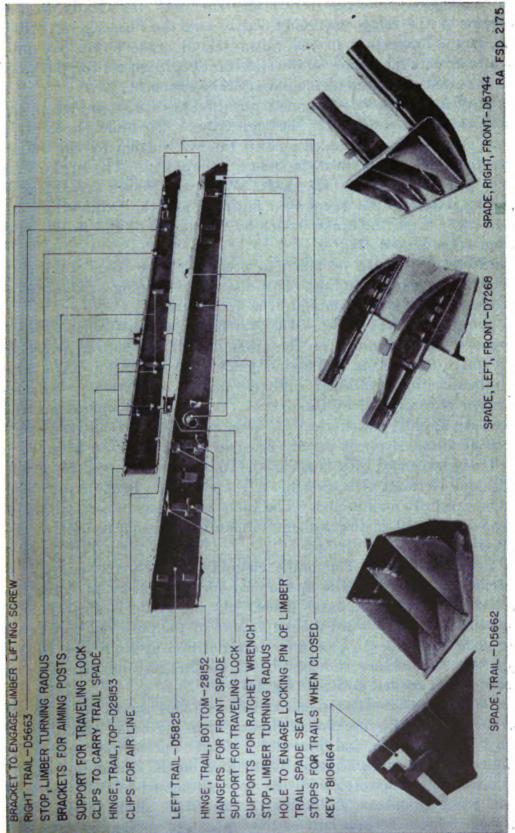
Trails-outside view left trail; inside view right trail-and spades.
